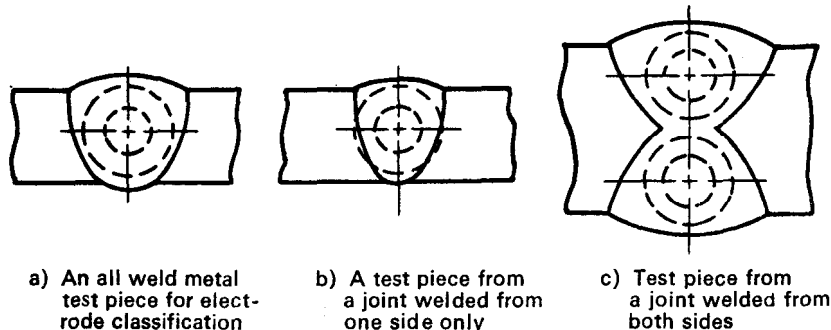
EXAMPLES OF TAKING TEST PIECES
